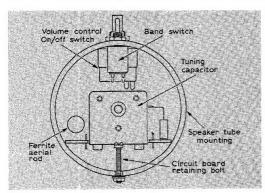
Disposition of the circuit board and major components inside the speaker tube.
